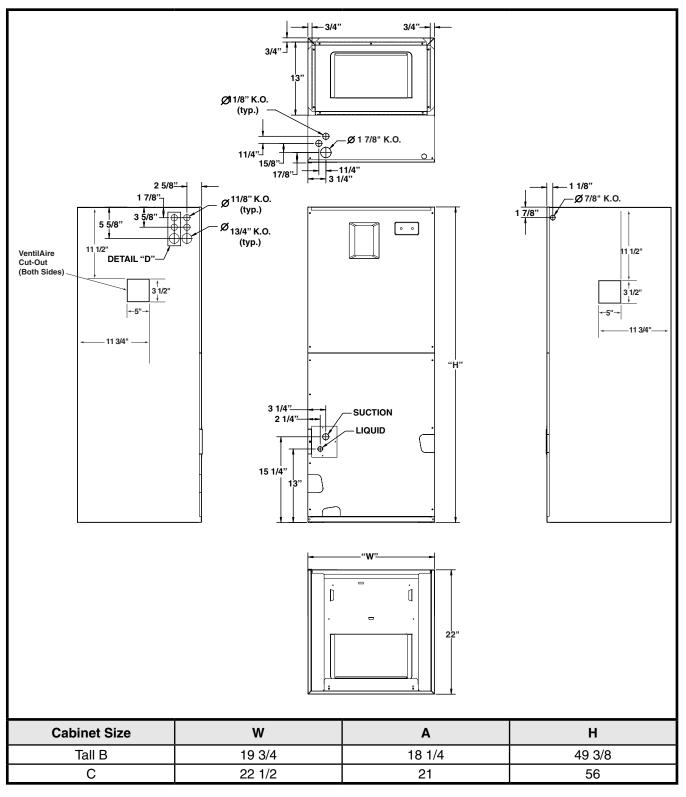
B5BV Series Electric Furnace Physical Dimensions
